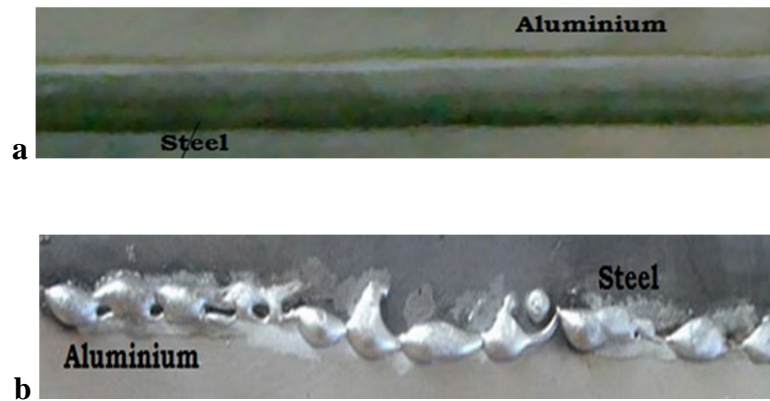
Bead appearance of dissimilar Al/steel joints a) uniform bead b) non-uniform bead.
